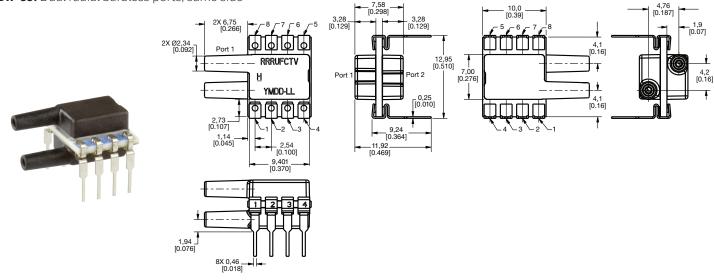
DIP PACKAGE DIMENSIONAL DRAWINGS (CONTINUED)
